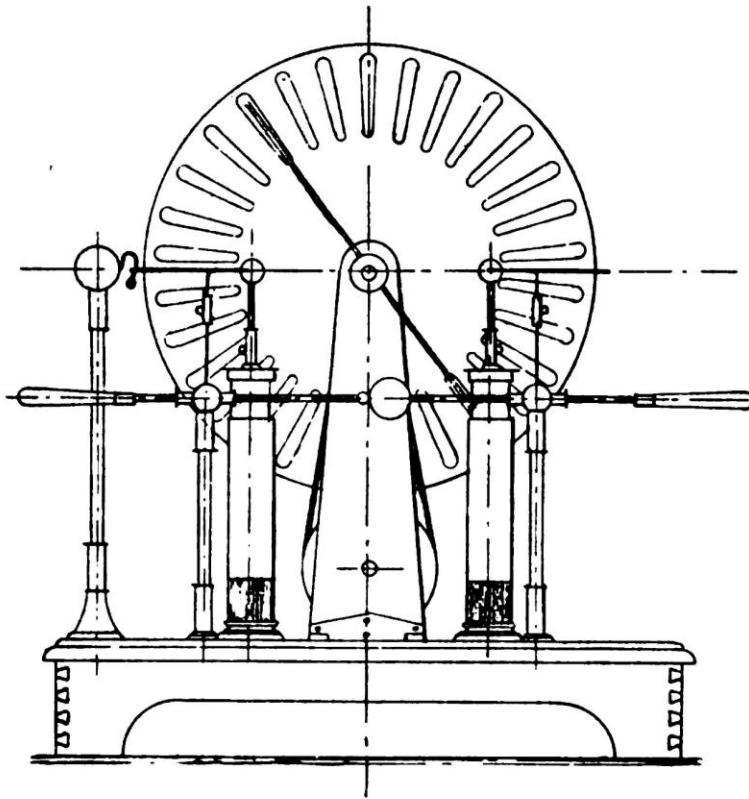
FRONT ELEVATION OF WIMSHURST MACHINE. Scale: 1 in. = 1 ft.
